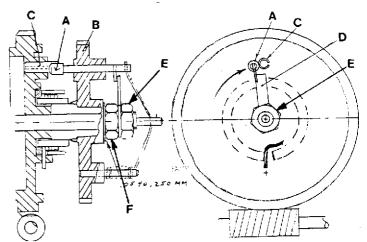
, FEED SPROCKET CLUTCH ADJUSTMENT
